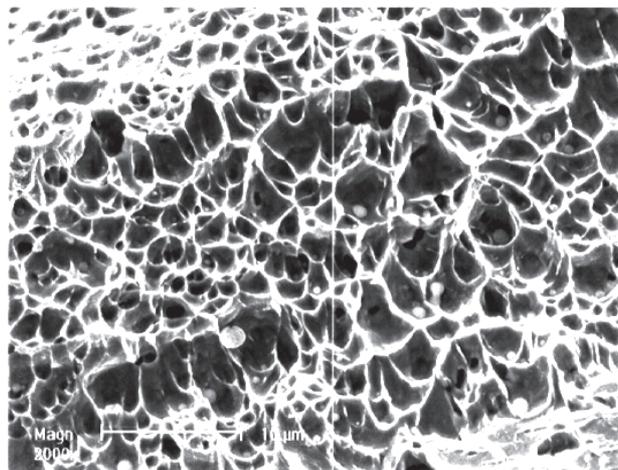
Fracture surface of metal weld deposit with 0.3 % Mo (small size of inclusions) [1]
